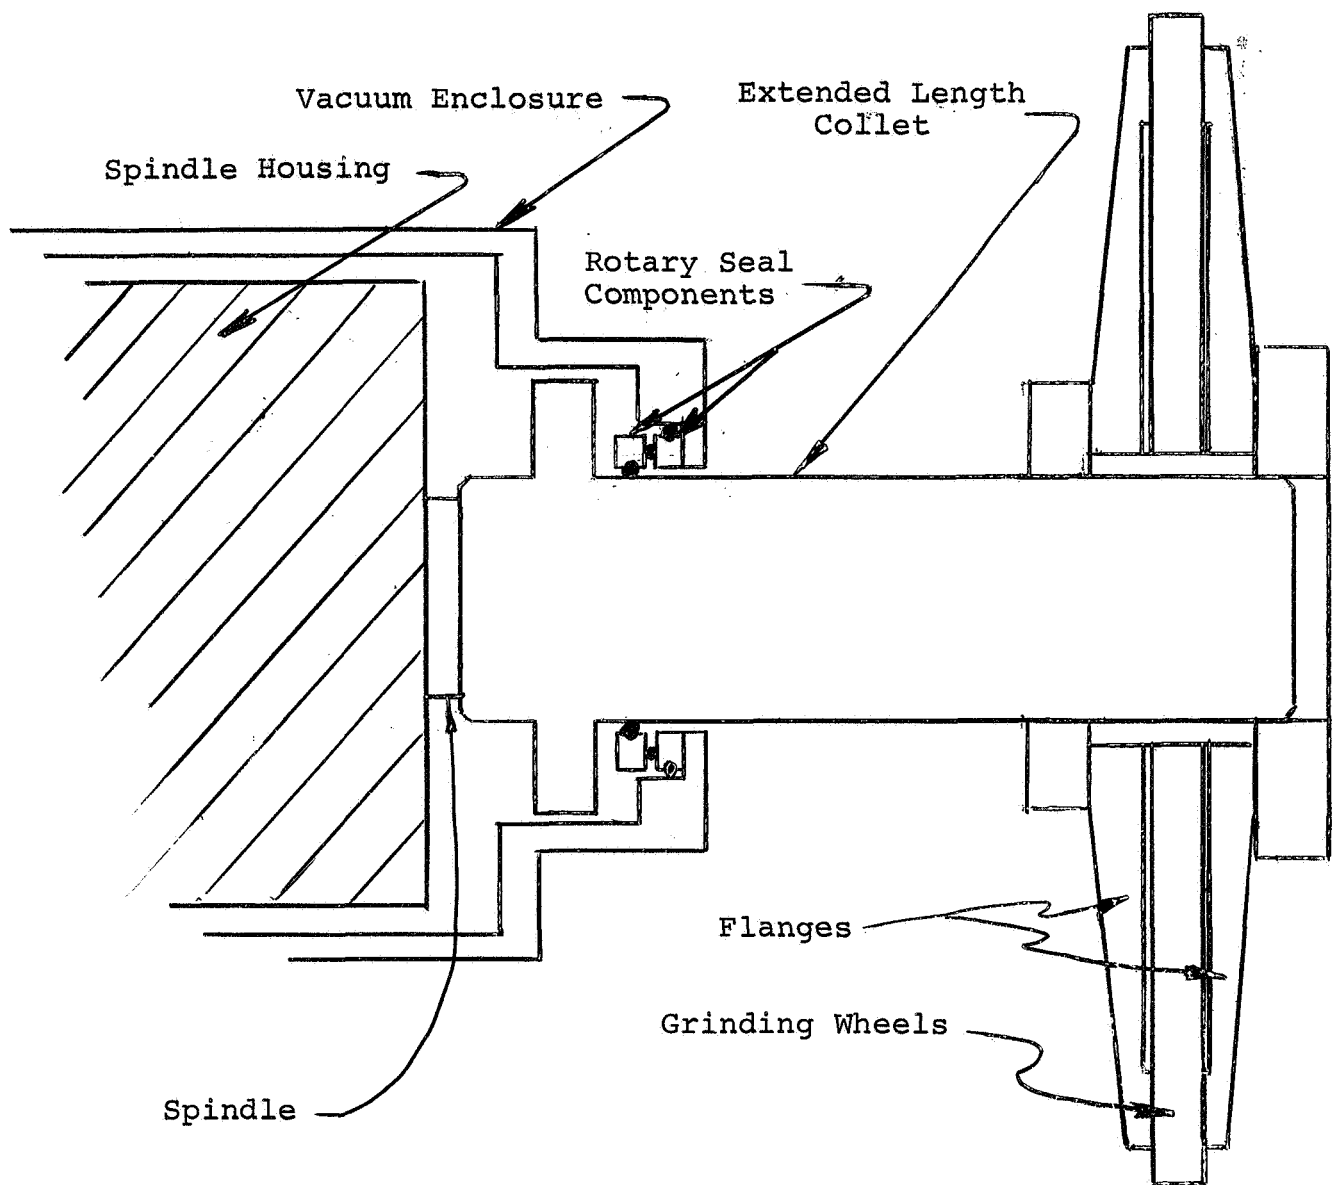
VACUUM GRINDING WHEEL ASSEMBLY
